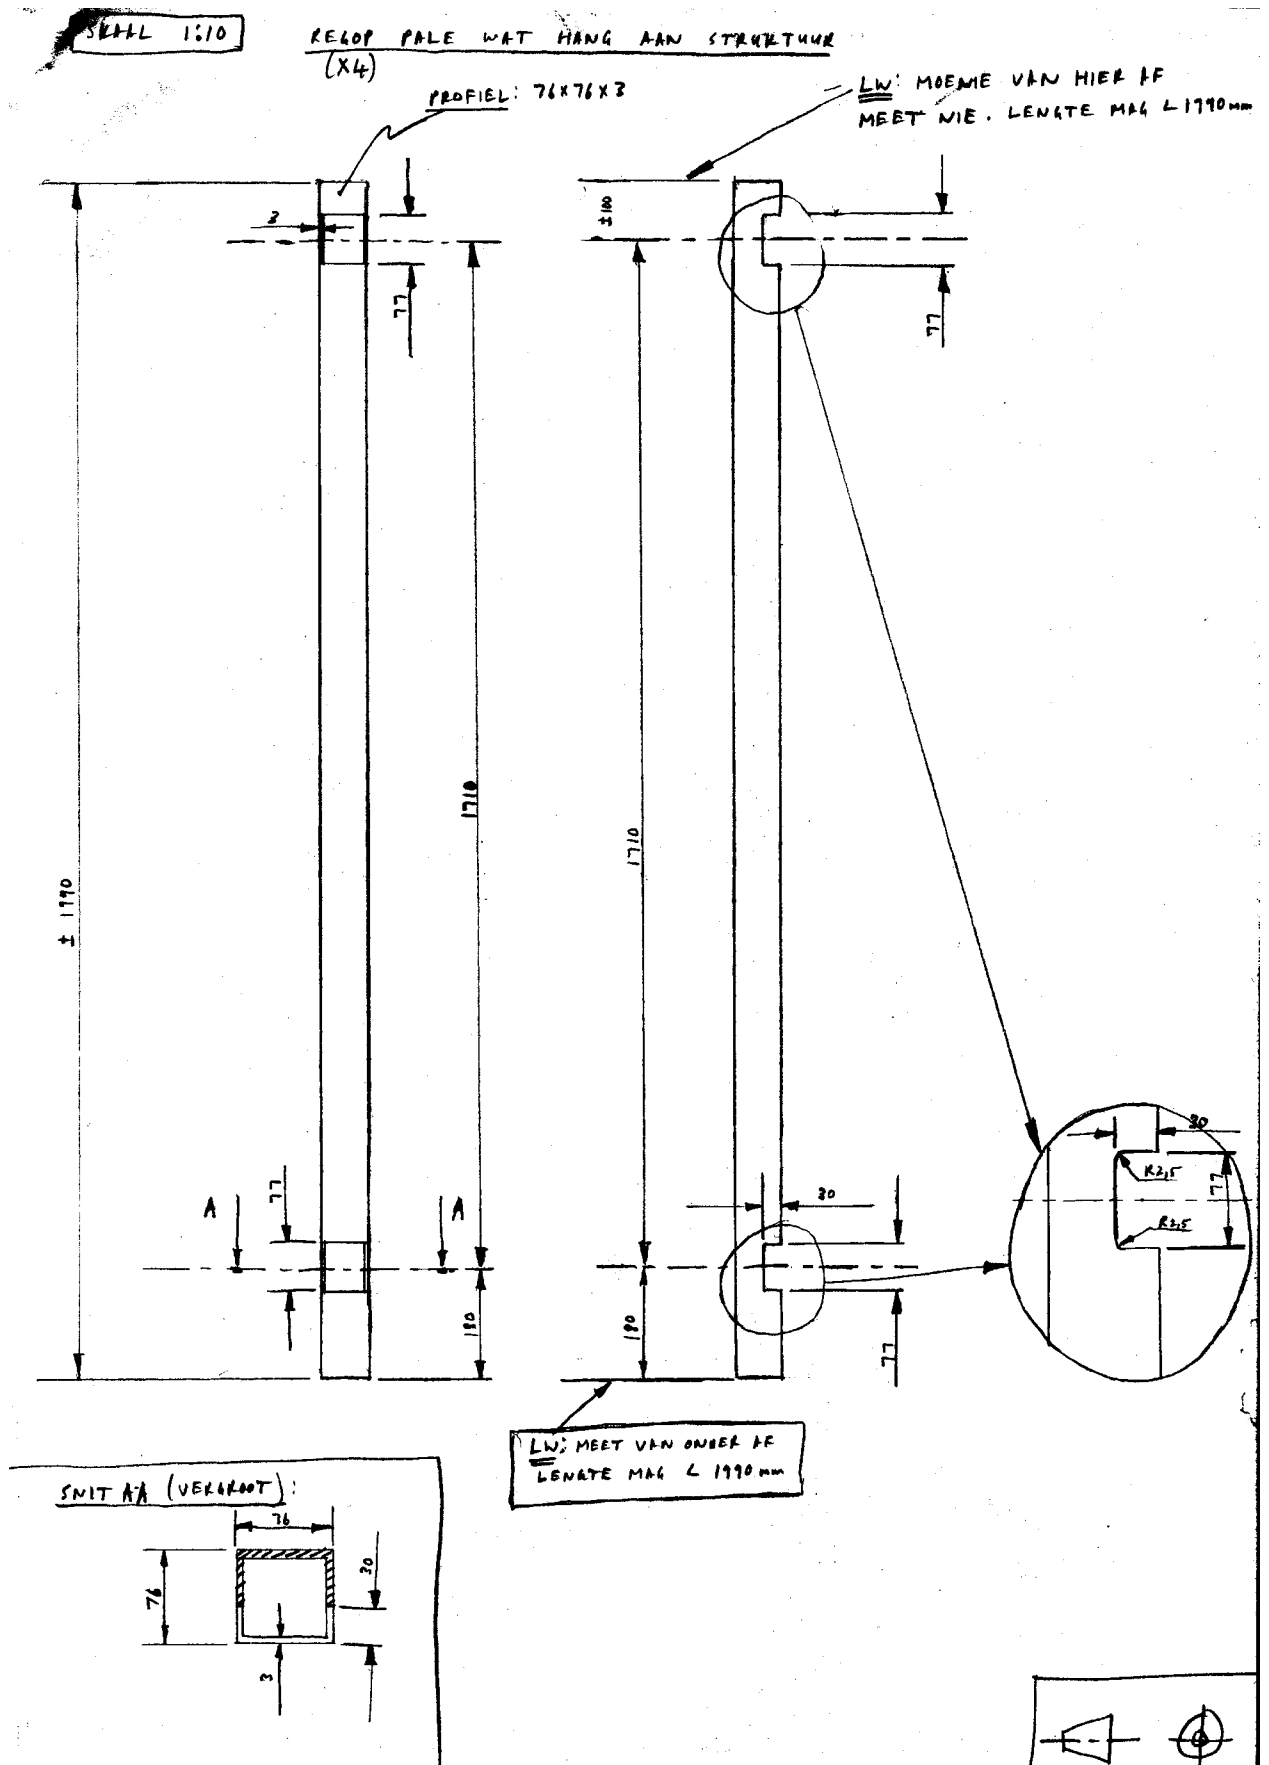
Water model frame: detail of hanging sections: Detail hand drawing
